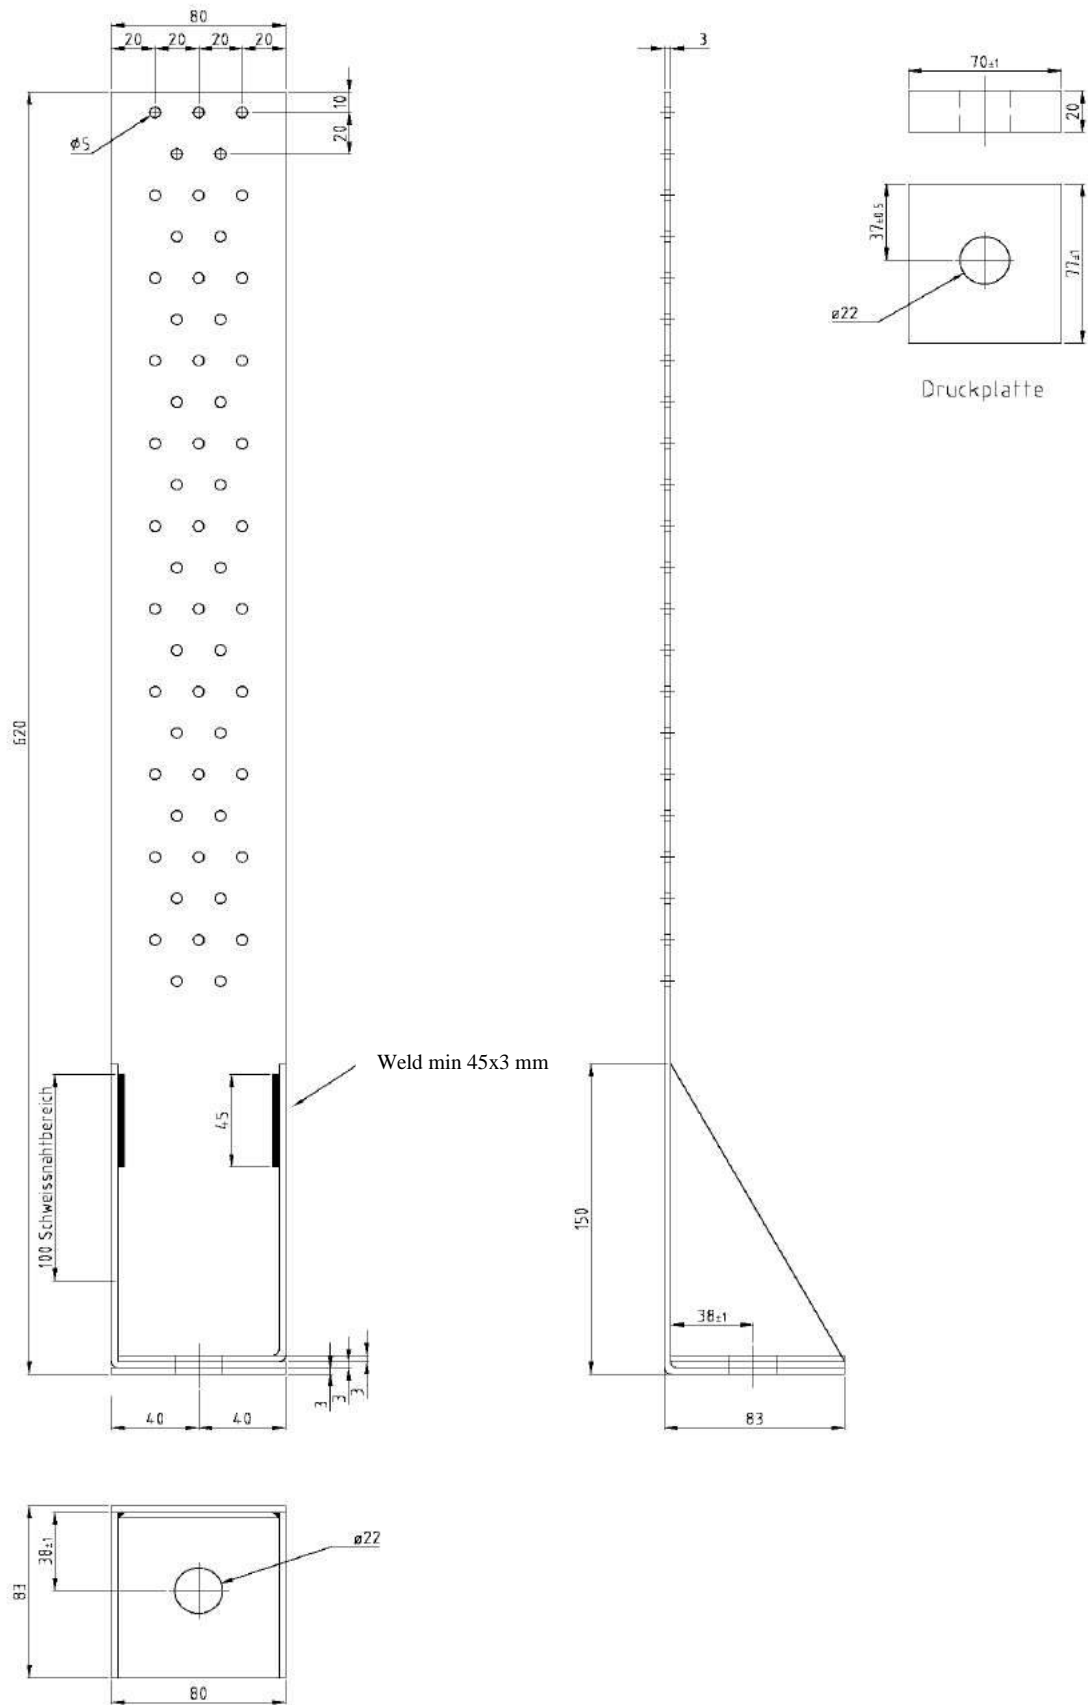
Dimensions of type WHT620 (drawing with washer 77x70x20)
